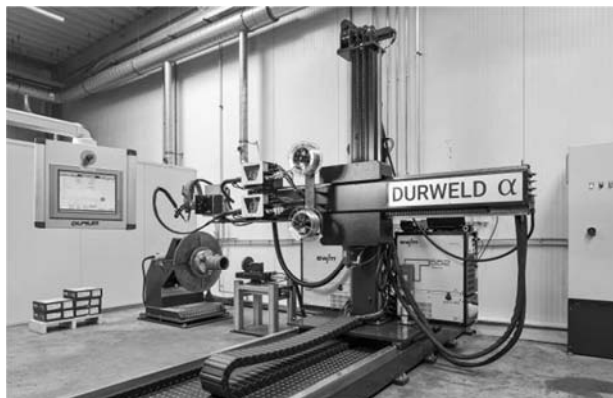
Welding system DURWELD Alpha used with EWM current source techniques
